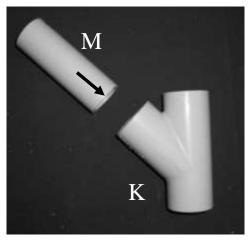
Assembly of the Medium/Large Wheelchair (Step 4).
